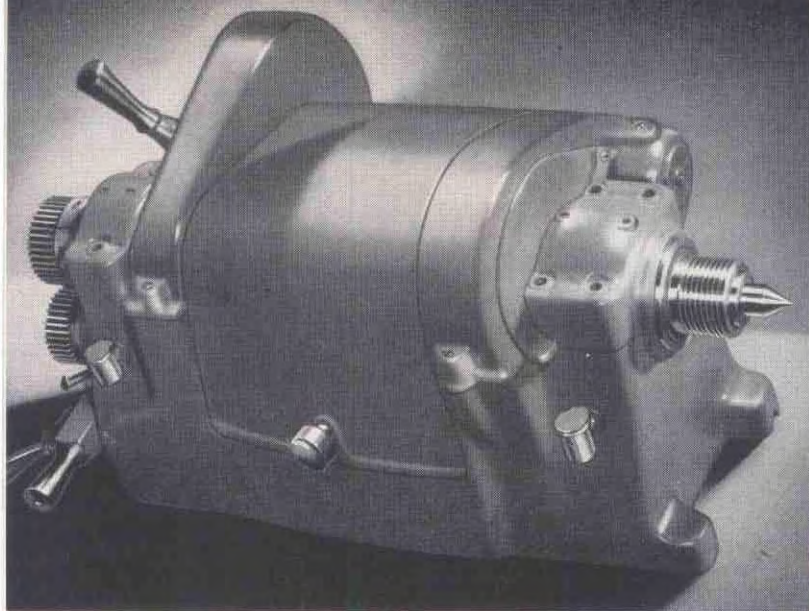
Headstock for 16-inch Swing South Bend Lathe
